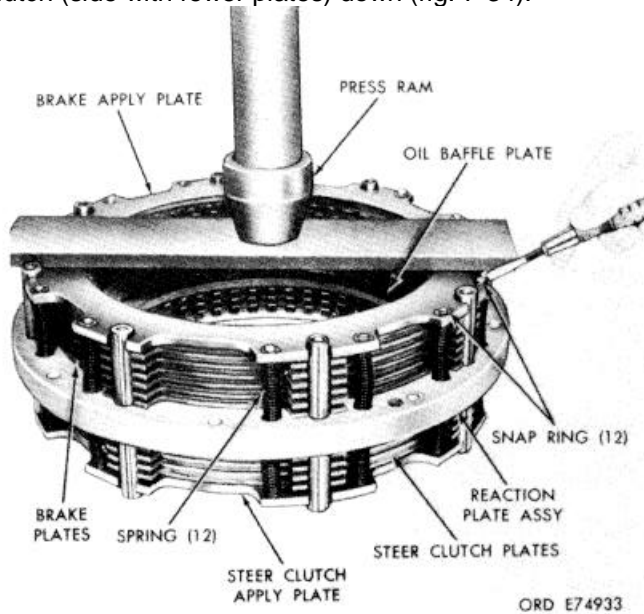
Removing or installing snaprings which retain brake and steer clutch release guide pins.
